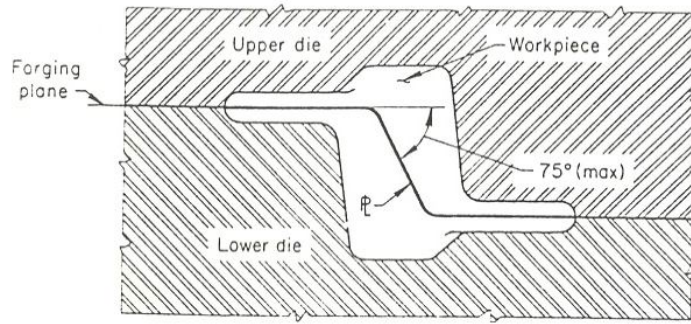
Die Set for Producing a Forging with Broken Parting Line [25]
